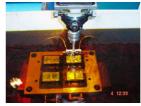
Investigating metal mould casting at O'Brein Plastics, Glenfield
